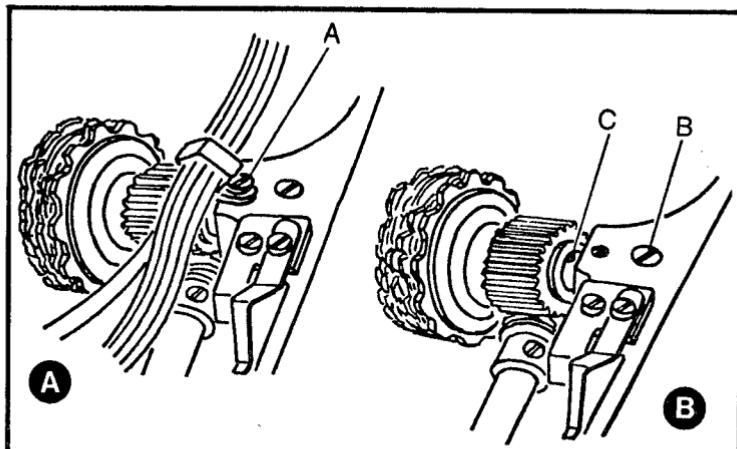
Noisy running of Models 782, 793, 804 and 970 may be due to incorrect meshing of the cam shaft gear to the main shaft gear.
